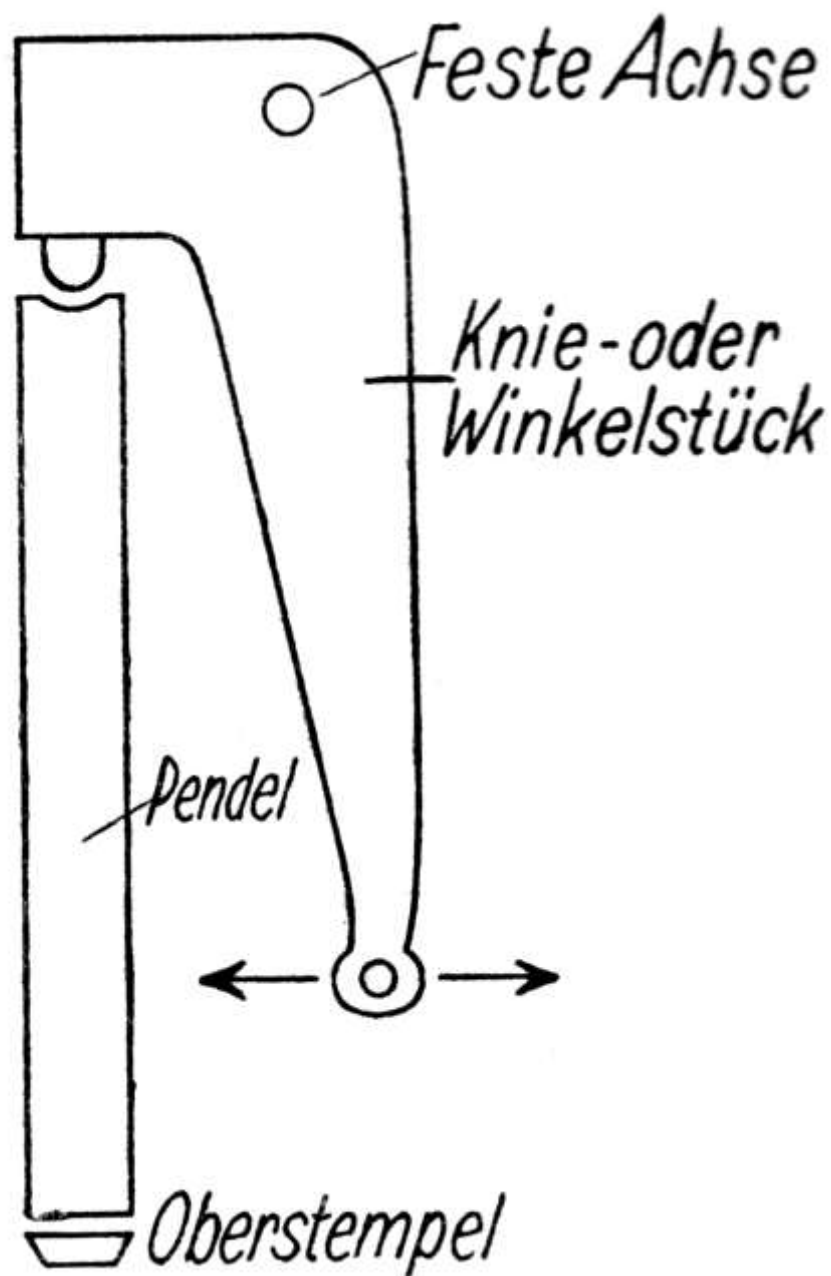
The knuckle-lever mechanism in the Uhlhorn machine.
